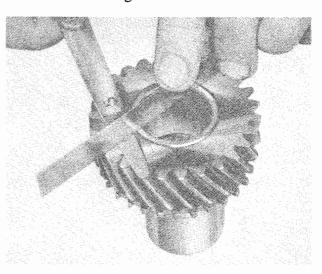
Checking Third Gear Mainshaft Constant Gear for End Float.
